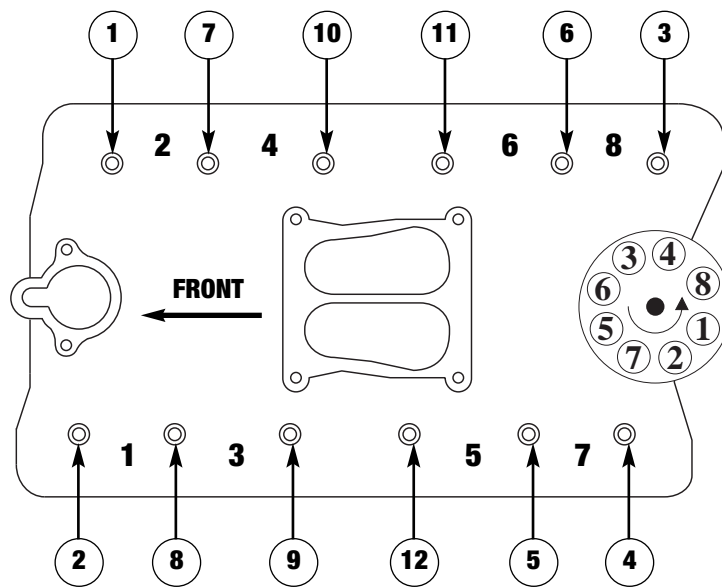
400-455 c.i.d. Oldsmobile Intake Manifold Bolt Tightening Sequence and Firing Order
